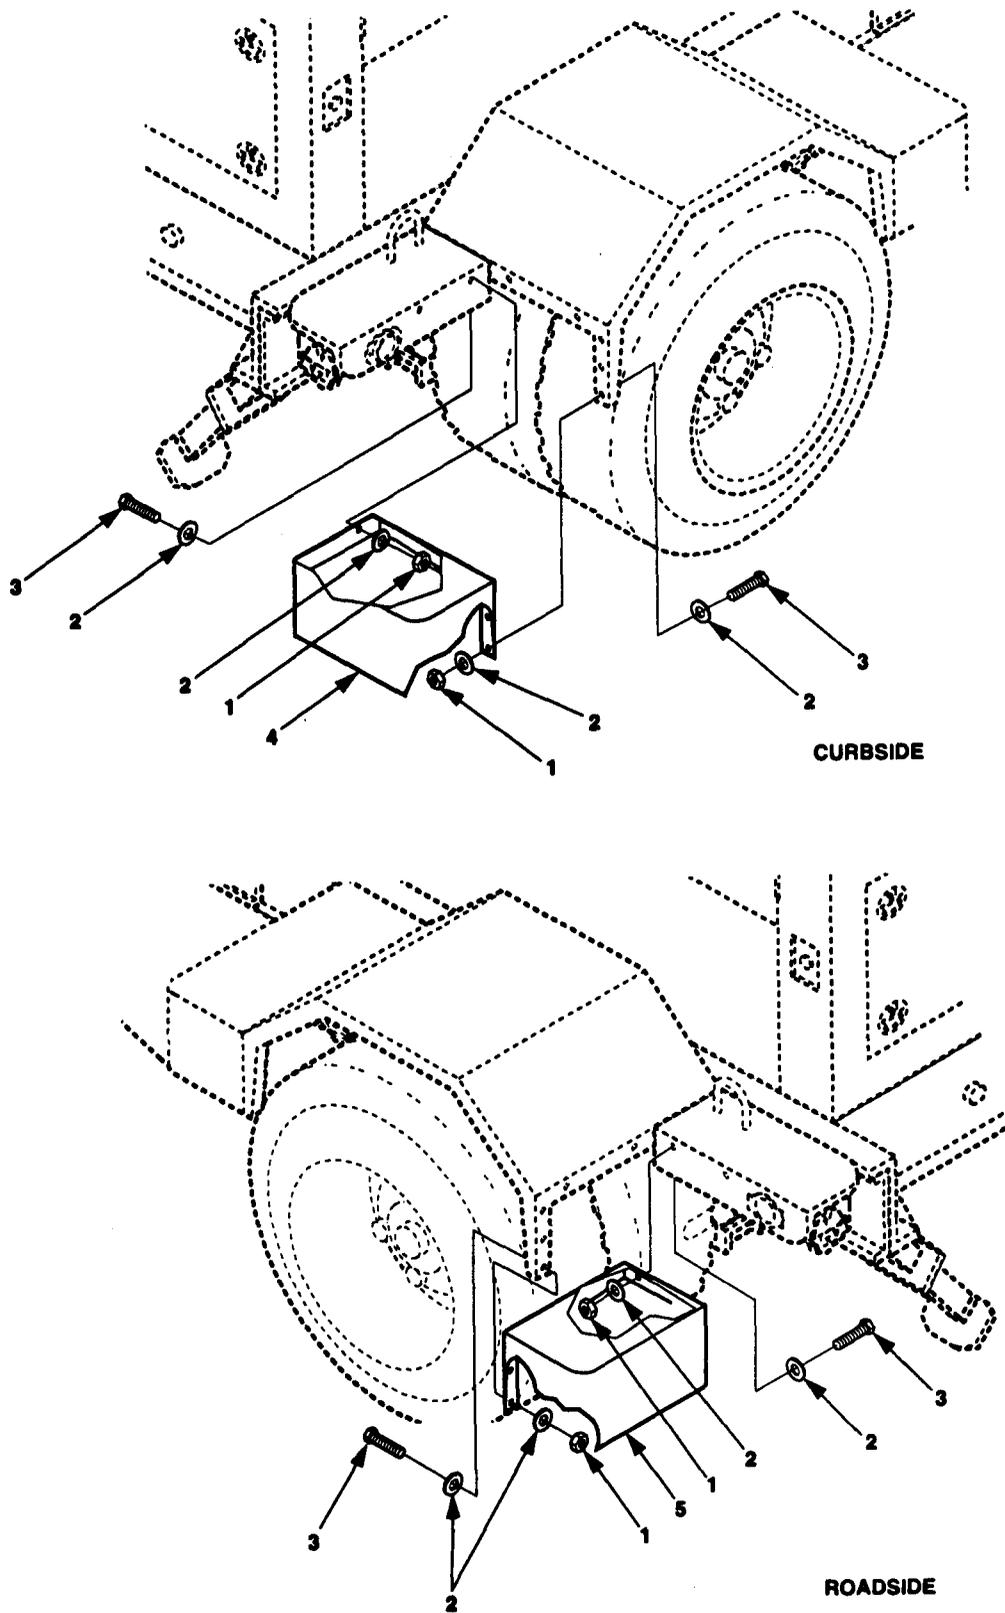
2.5 Ton Trailer, Rear Steps.
